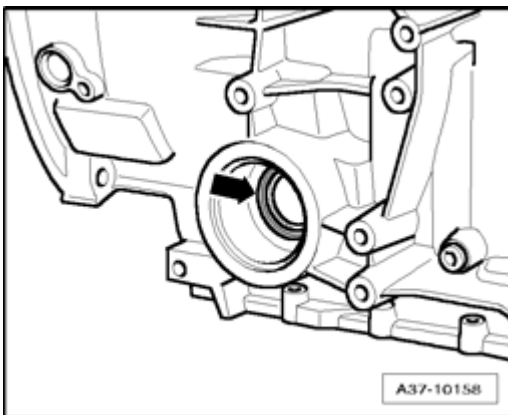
Locating Securing Ring For Protective Tube On Left Transmission Side
